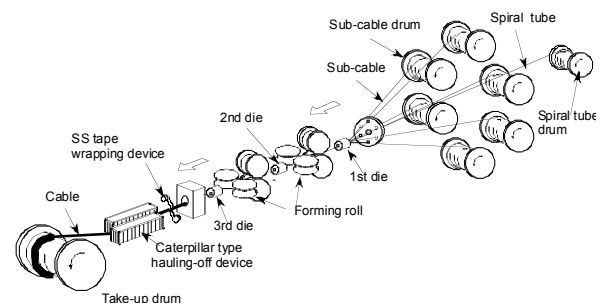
Cabling machine of TF cable. The sub-cable is twisted around the central cooling channel and the cable is wrapped by 0.08-mm thick stainless steel (SS) tape.
